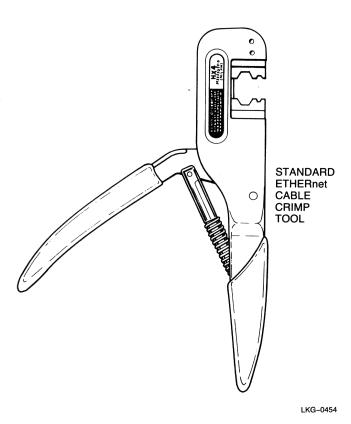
Standard Ethernet Cable Crimp Tool and Die Set
